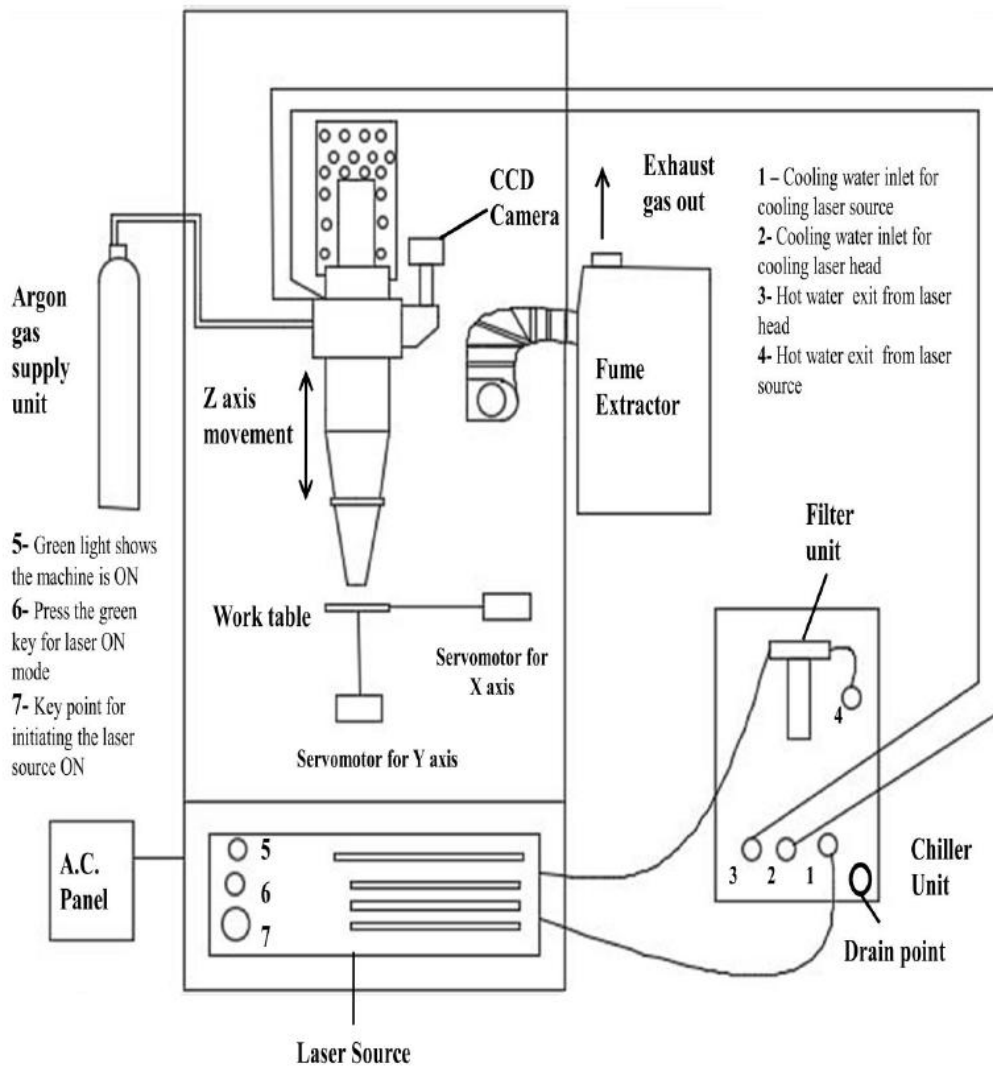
Schematic diagram of the Laser Welding Machine
